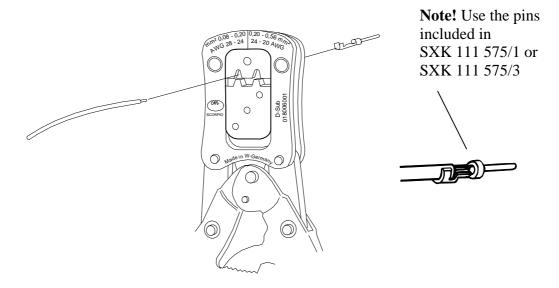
Crimping a wire (crimp tool LSD 319 11).
